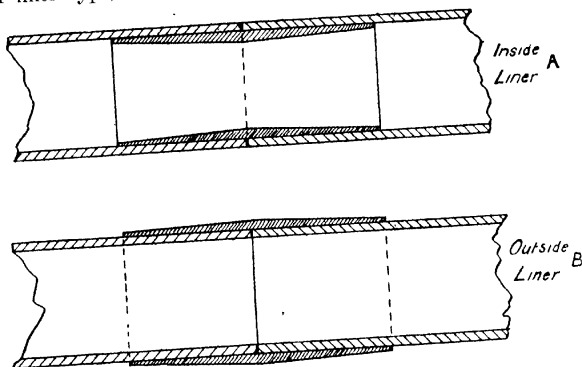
LINERS FOR TUBULAR JOINTS.
